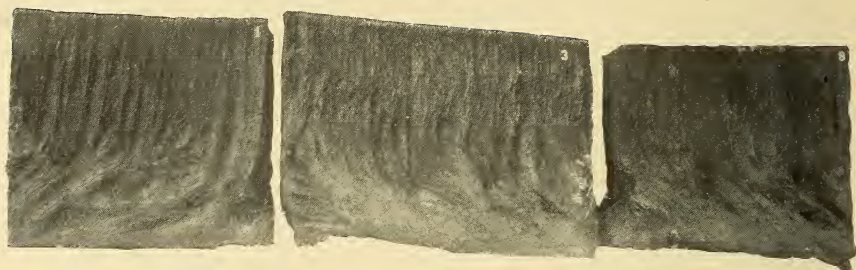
Oxyacetylene cuts on 10-inch steel showing irregularity of cut
